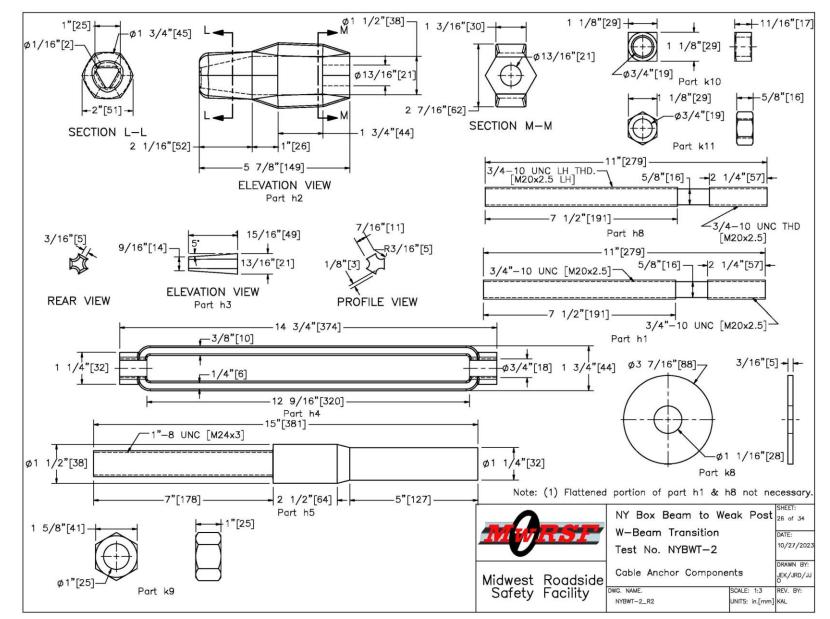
Cable Anchor Components, Test No. NYBWT-2
